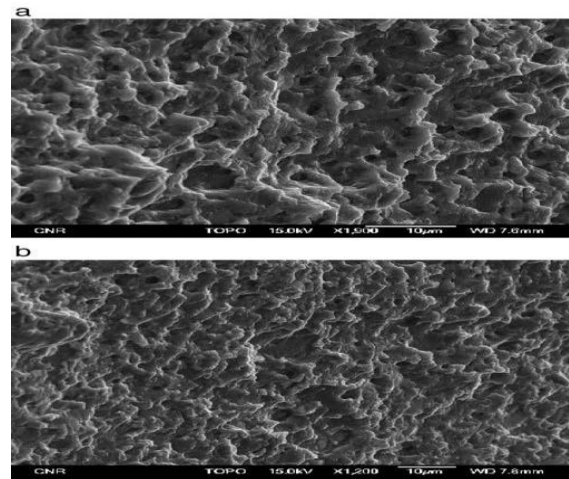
Fracture surfaces of the specimens tested in fatigue at 210 (a) and 160 (b) MPa stress amplitude
